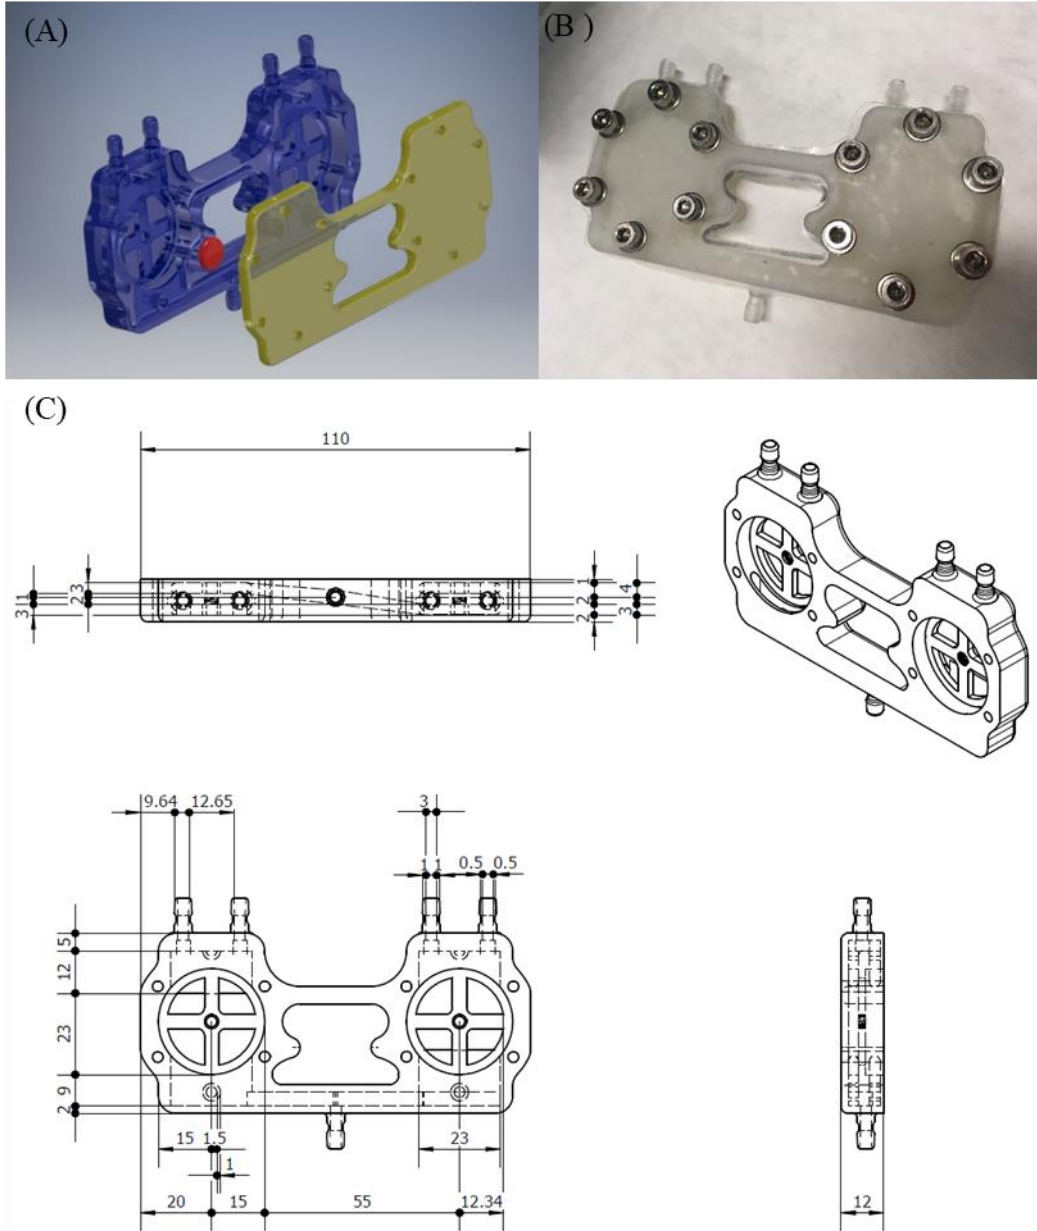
‘Leaky’ valve design. (A): Schematic design of the ‘leaky’ valve; (B): 3D-printed and assembled product; (C): Three-view drawing and dimensions of the ‘leaky’ valve. Rubbers were placed in both chambers to allow one-way flow of the fluid. For the outlet chamber, the rubber was not tightly fixed so that small stream of flow could be injected back to the mesh bag for back wash.
